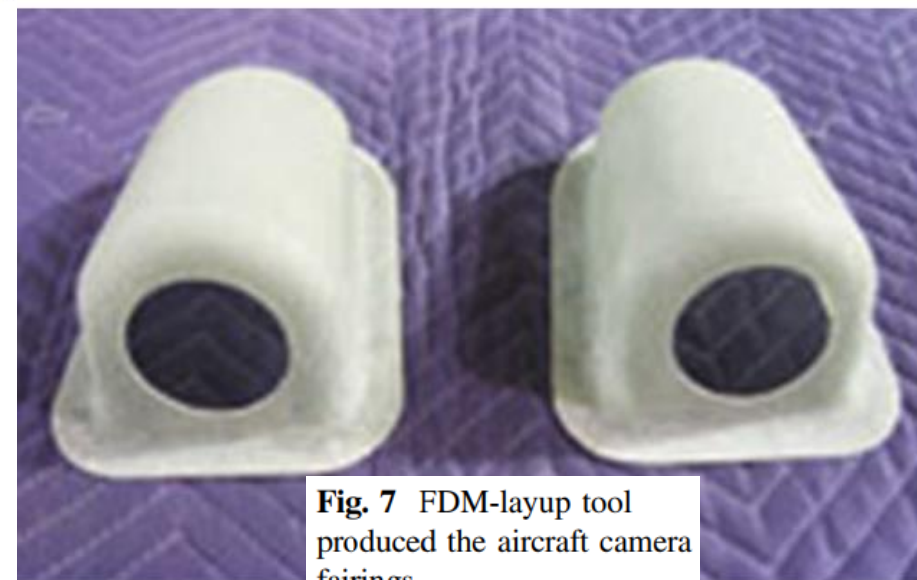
FDM-layup tool produced the aircraft camera fairings
